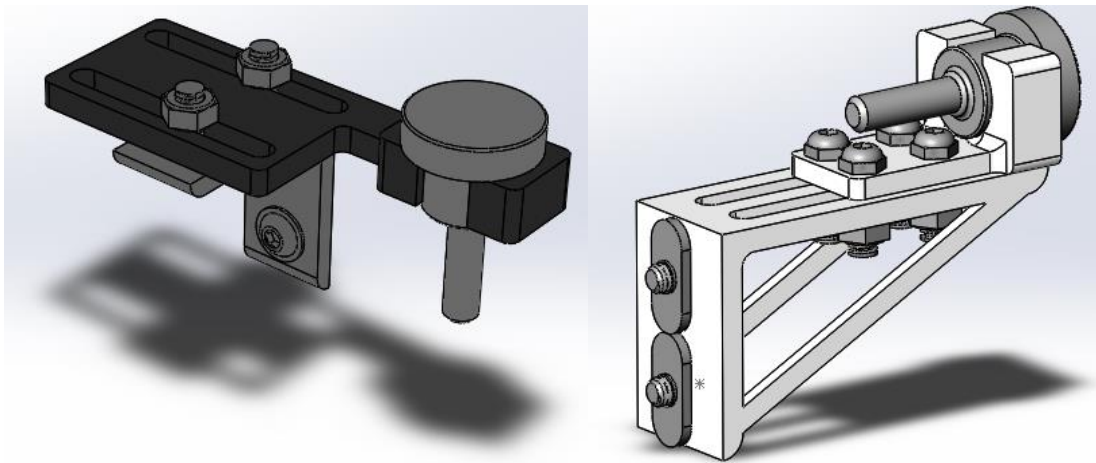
Sliding clamp mounts for the vertical (left) and horizontal (right) capacitive sensors.
